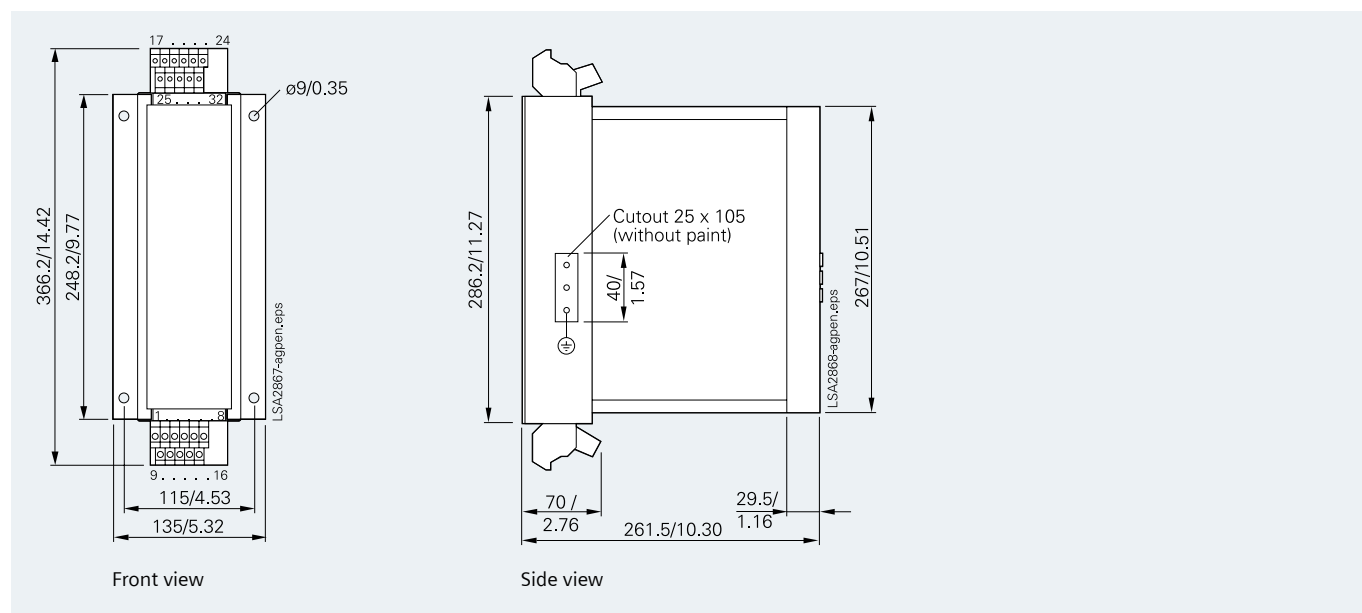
/16 Housing for surface mounting, terminals at top and bottom (1/6 × 19")
